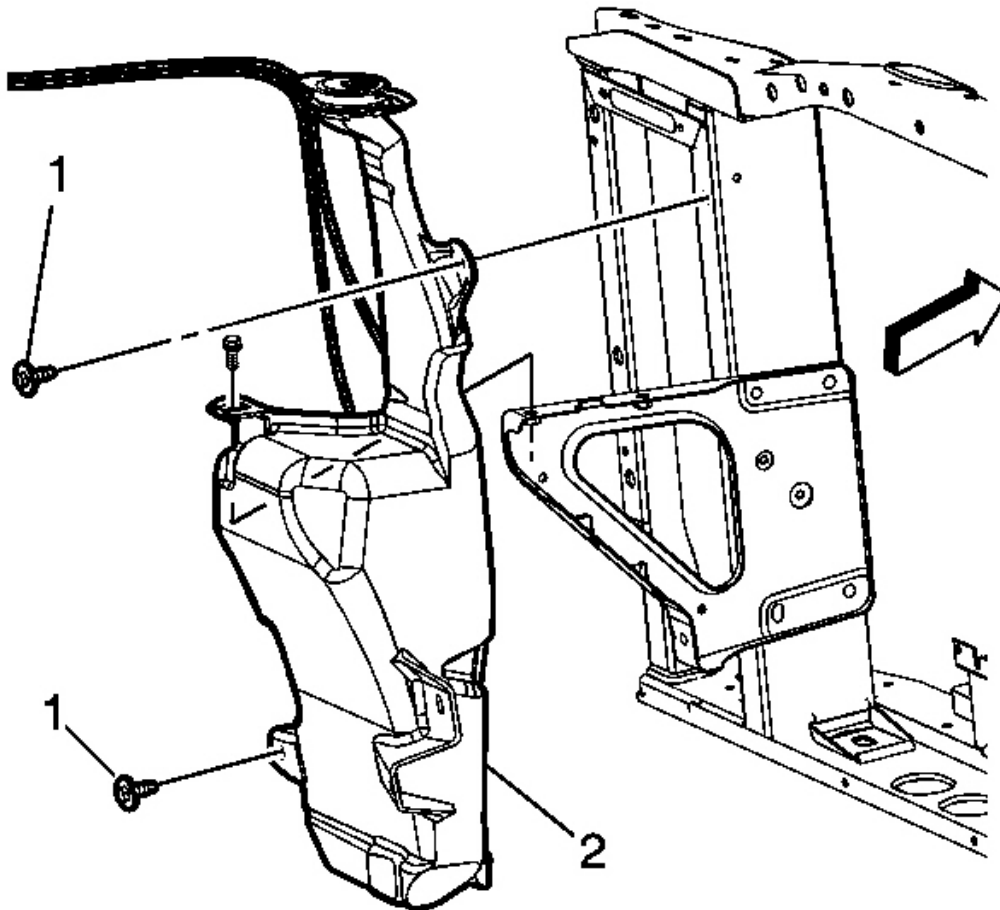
View Of Windshield Washer Pump Hose Assembly & Components
